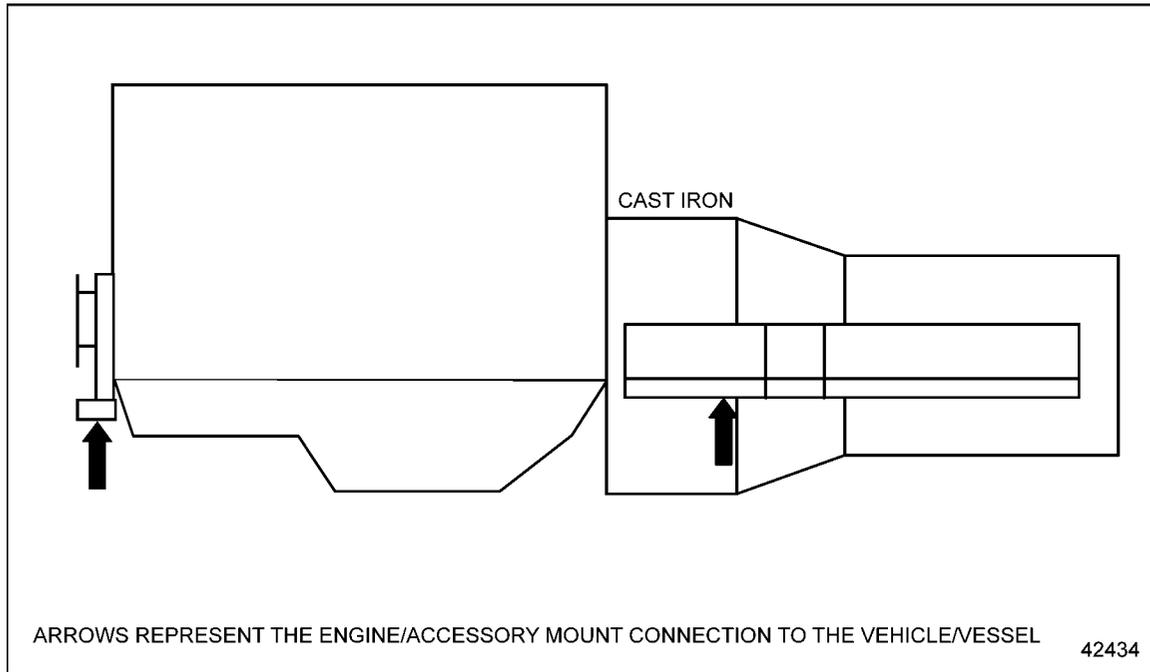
Three-Point Mounting with a Set of Rear Cradle Mounts
